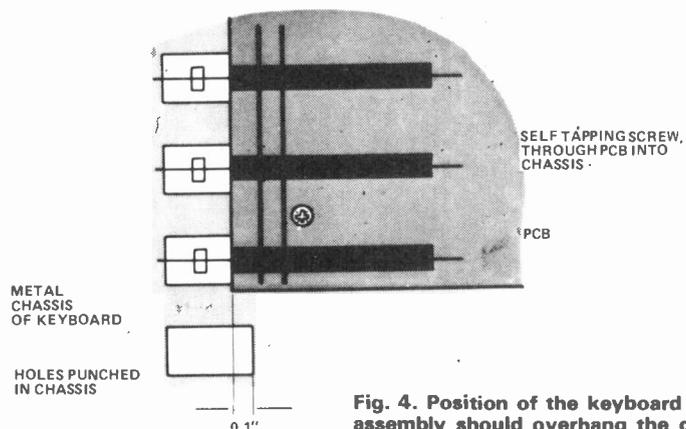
Position of the keyboard PCB. The assembly should overhang the chassis by 0.1".
